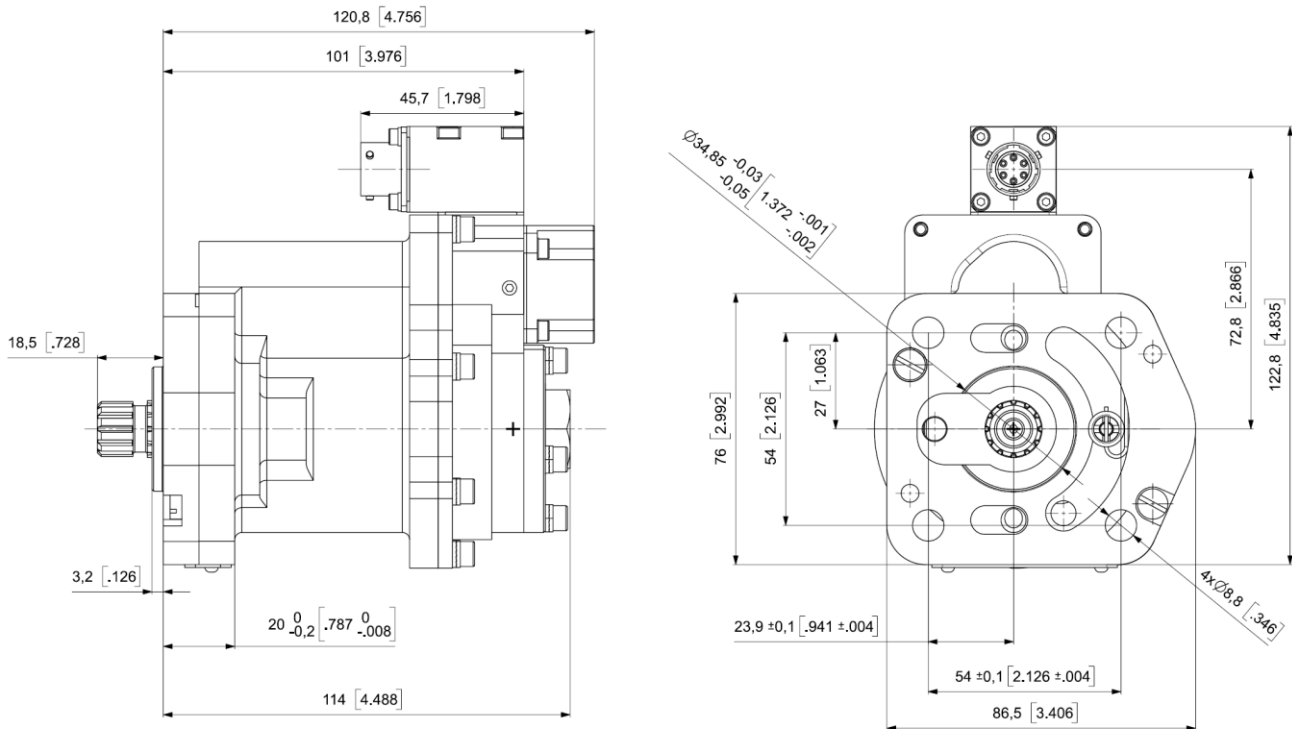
P-AB5-X/E12 outline dimensions (dimensions in brackets are in inches), exact dimensions are specified at GAD
